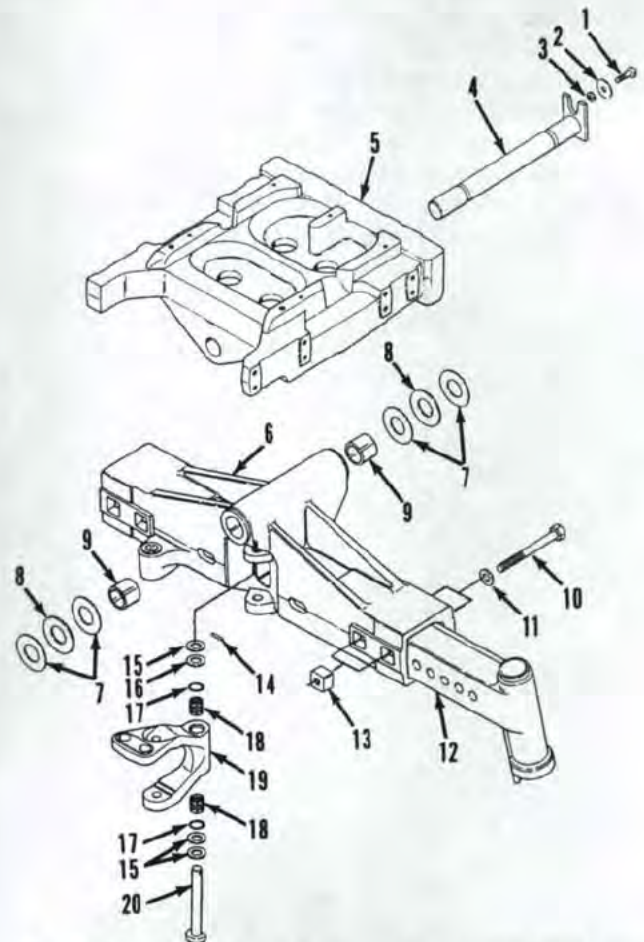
Exploded view of axle main member, front support and related parts used on all two-wheel drive tractors.
